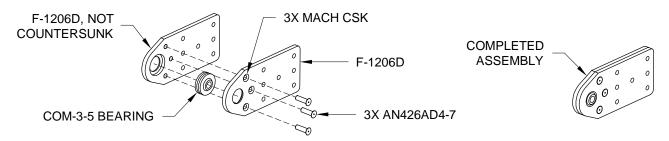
RIVETING BEARING BRACKET ASSEMBLIES
